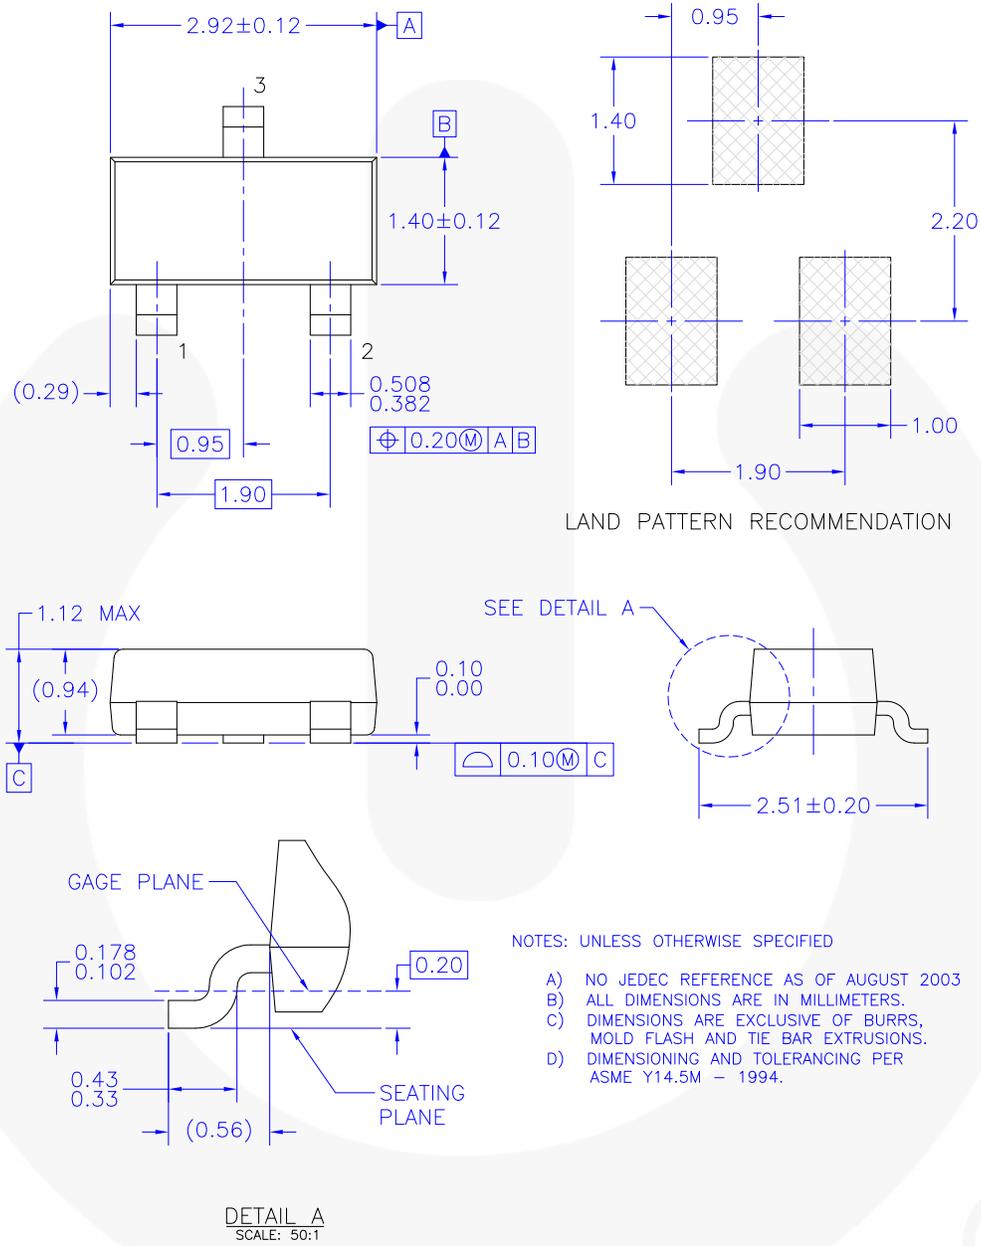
MOLDED PACKAGE, SUPERSOT, 3-LEAD
